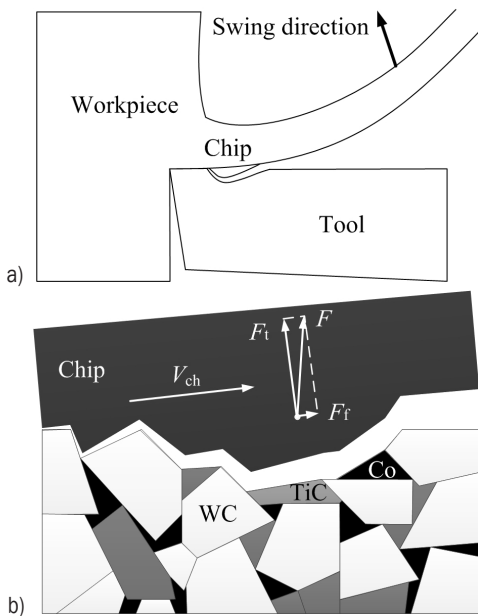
Force analysis of the adhesion layer when the chips are removed from the rake face; a) schematic diagram of bond failure on the rake face during the cutting process, and b) the force condition of the cutting tool during the cutting process
